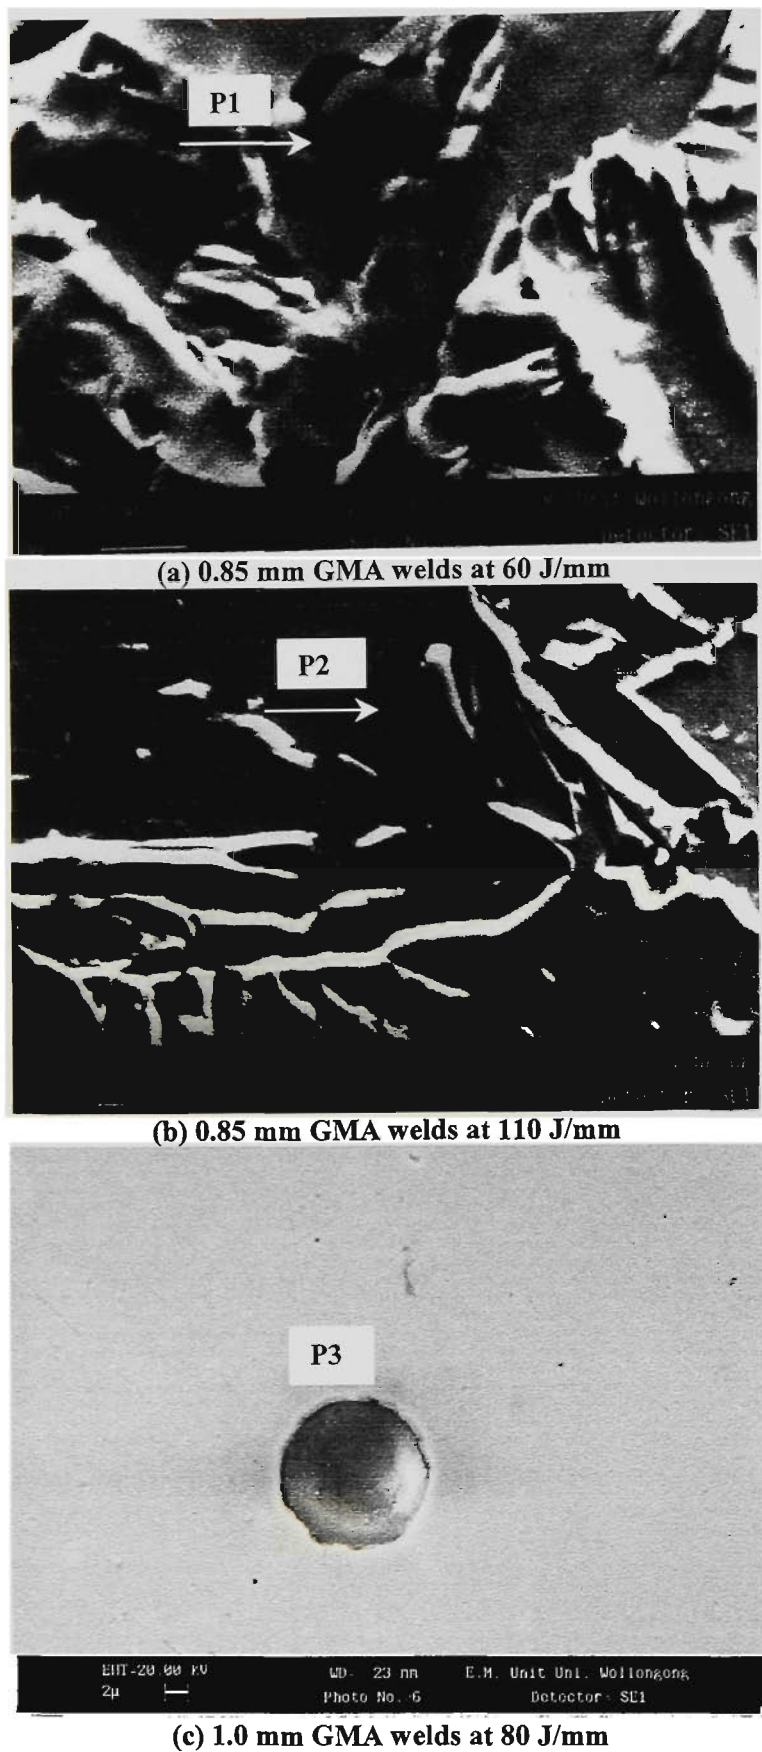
SEM micrographs showing Al-rich particles P1, P2 and P3 in the weld metal of GMA welded ZINCALUME™ G550 sheet steel.
